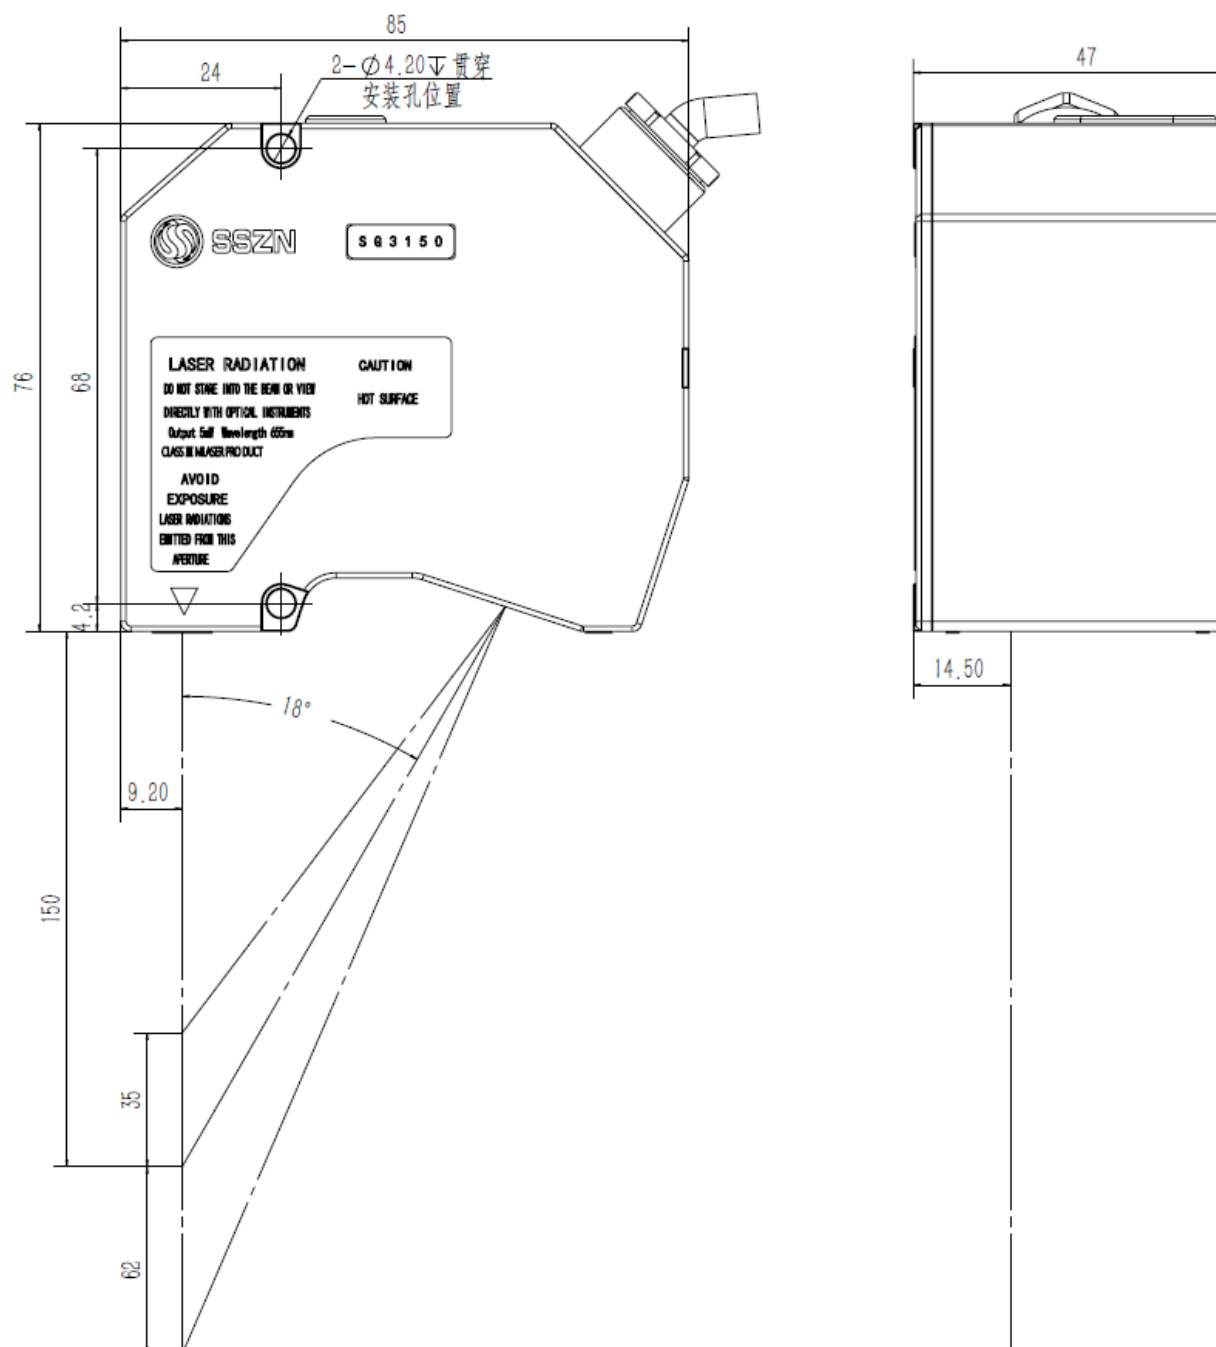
SG3150/5 Sensor Head dimensional diagram Unit (mm)
